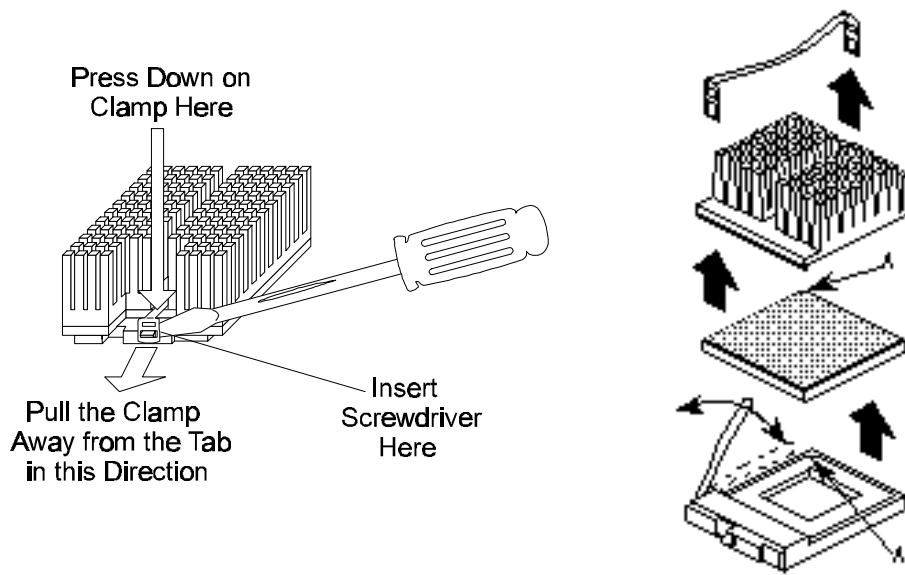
Removing the 5160D/5200D Spring Clamp, Heat Sink, and Microprocessor
